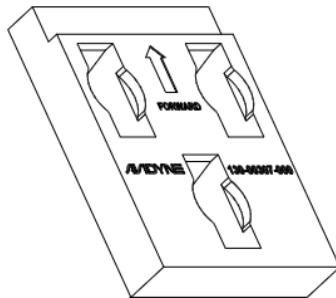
Standoff Locator Tool P/N: 130-00307-000 (Pre G3)
